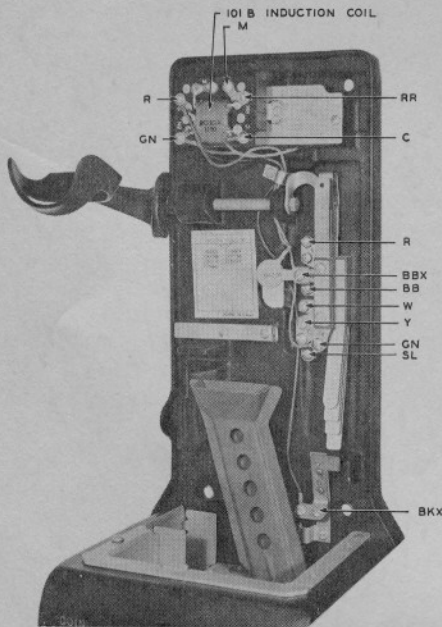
182C, D—LOWER HOUSING AND BACKPLATE TERMINALS
